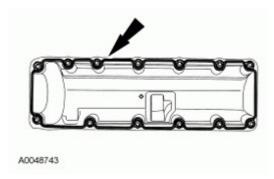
Identifying Adhesive Applying Area Around Gasket Courtesy of FORD MOTOR CO.
